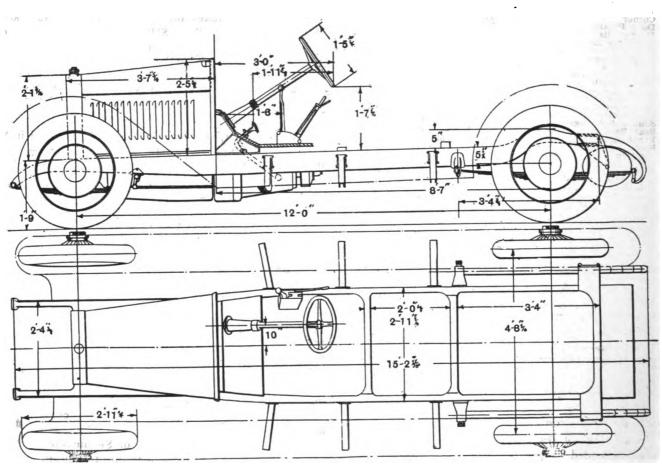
Body builders' drawing of the Delage chassis, showing dimensions of Important parts.
